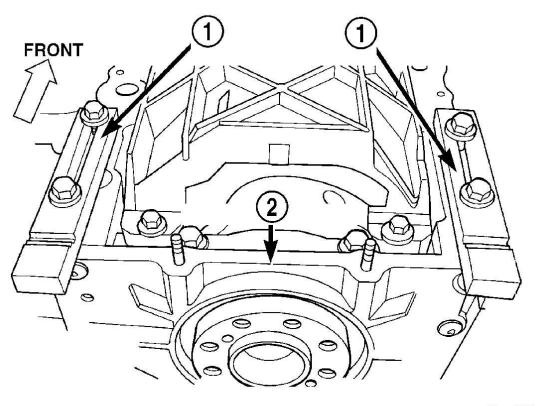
Identifying Oil Seal Retainer Courtesy of CHRYSLER LLC
